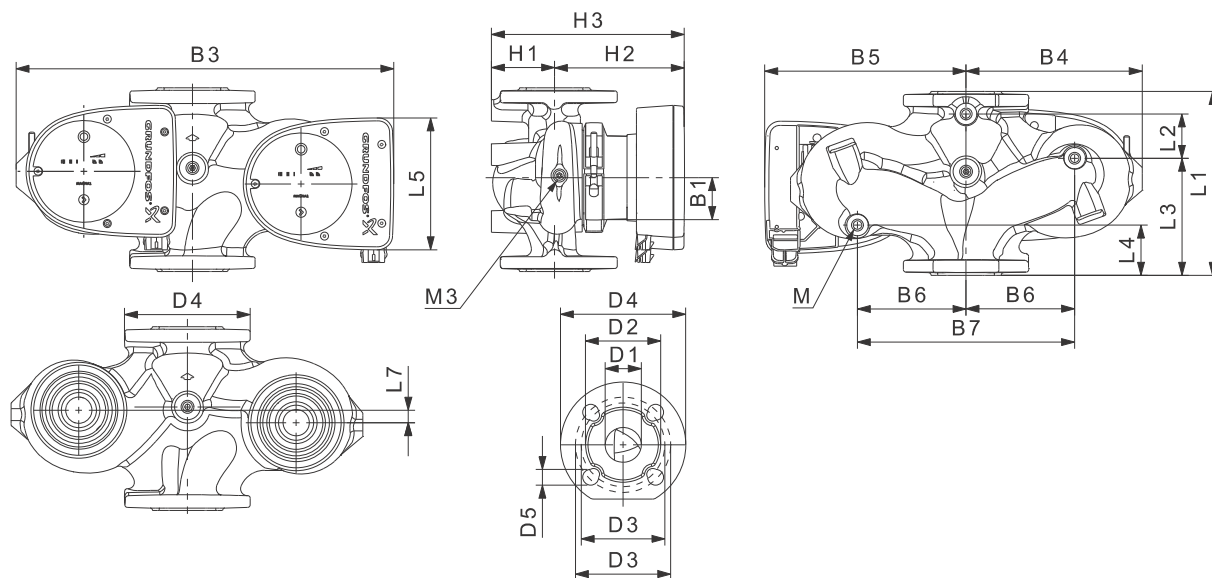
Twin-head pump dimensions, plug-connected versions, flanged version
